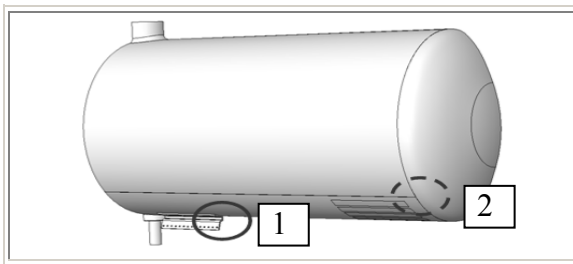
Calculating model  $\frac{1}{4}$  of barrel: 1- welding seams of shaped pads, 2-T-joint of the barrel seams
